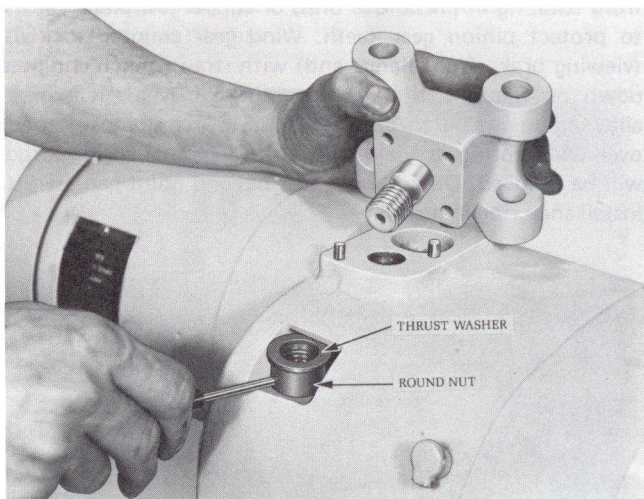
Removing Suspension Lug (1/4 Thru 1 Ton Model)
